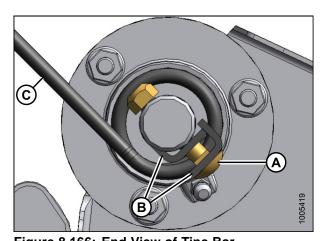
End View of Tine Bar A - Bolt B - Keepers
